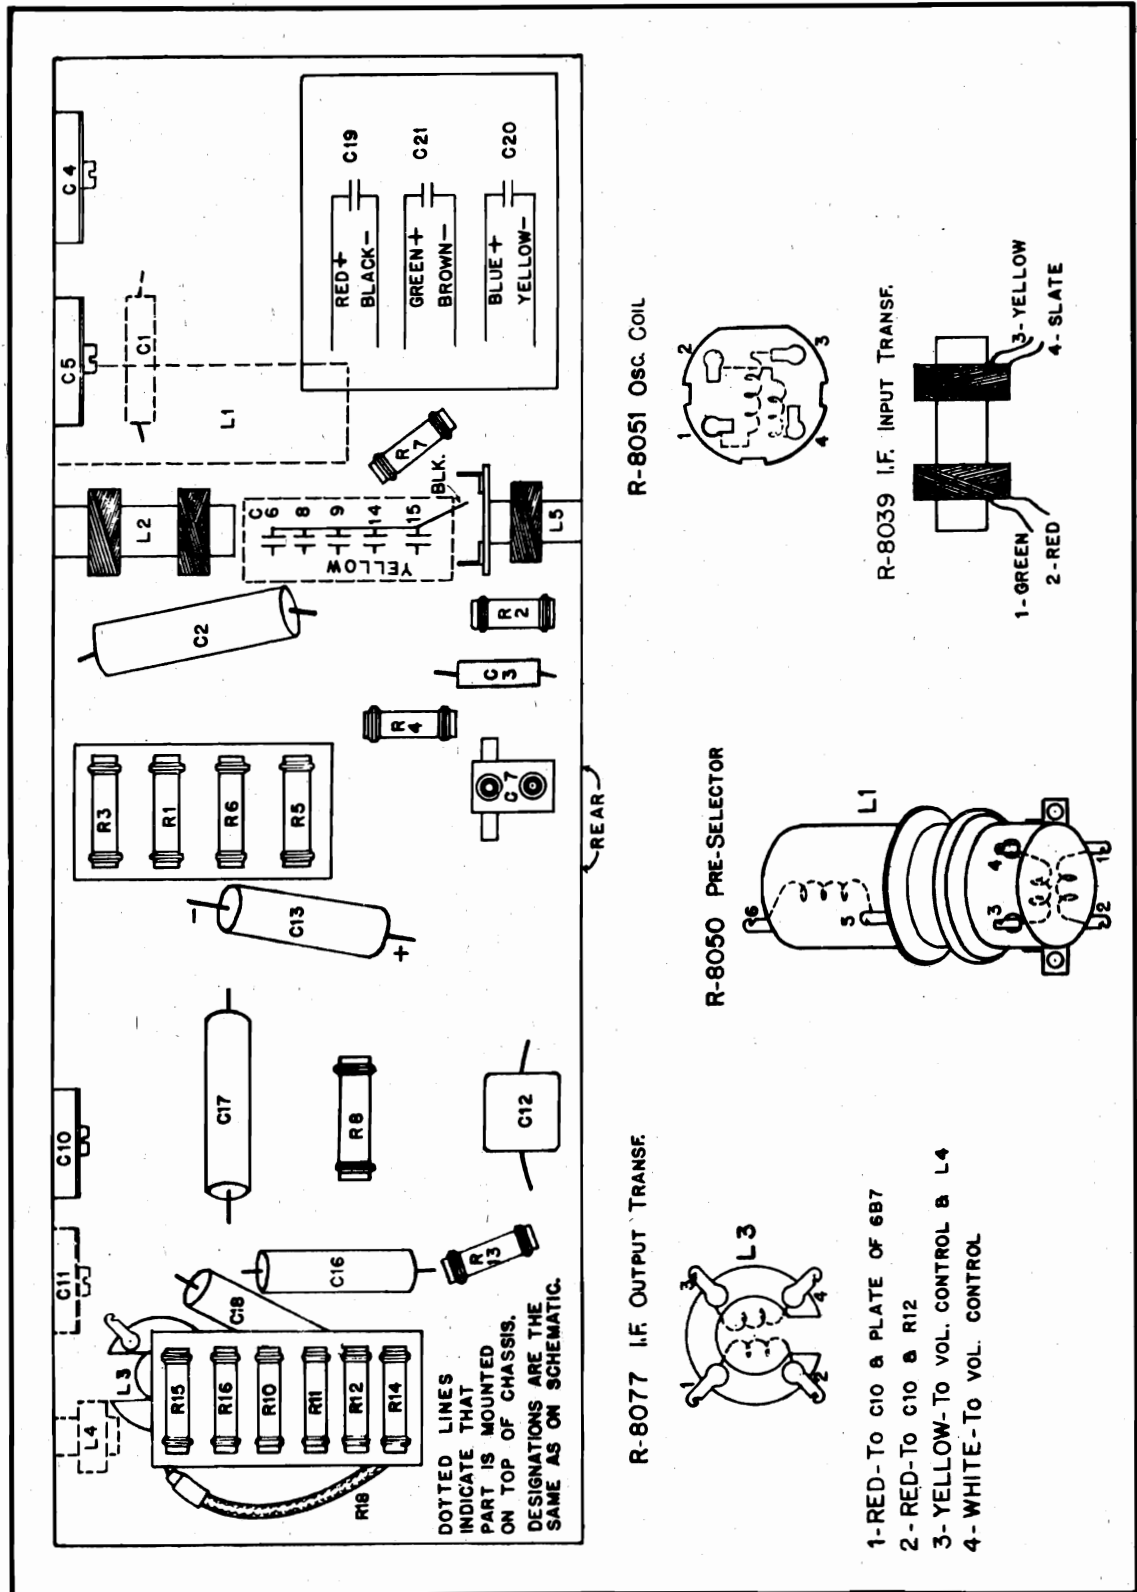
ILLUSTRATION FOR LOCATION OF PARTS AND COIL CONTINUITY CHECKING.
